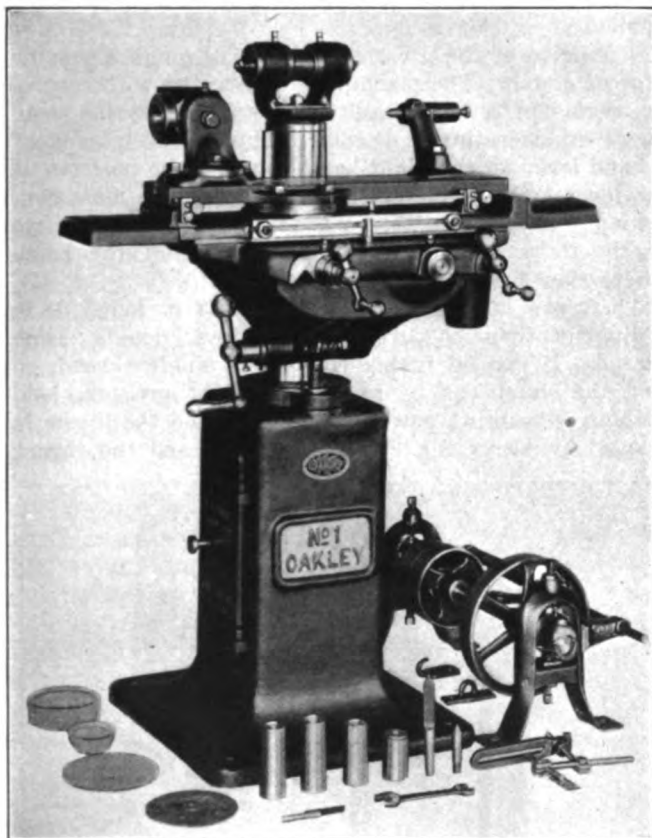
OAKLEY NO. 1 CUTTER GRINDER
